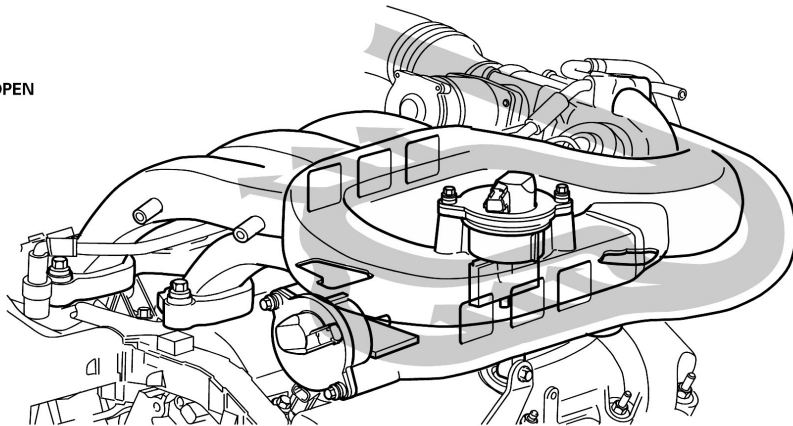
INDUCTION MANIFOLD (AJ60 shown)
